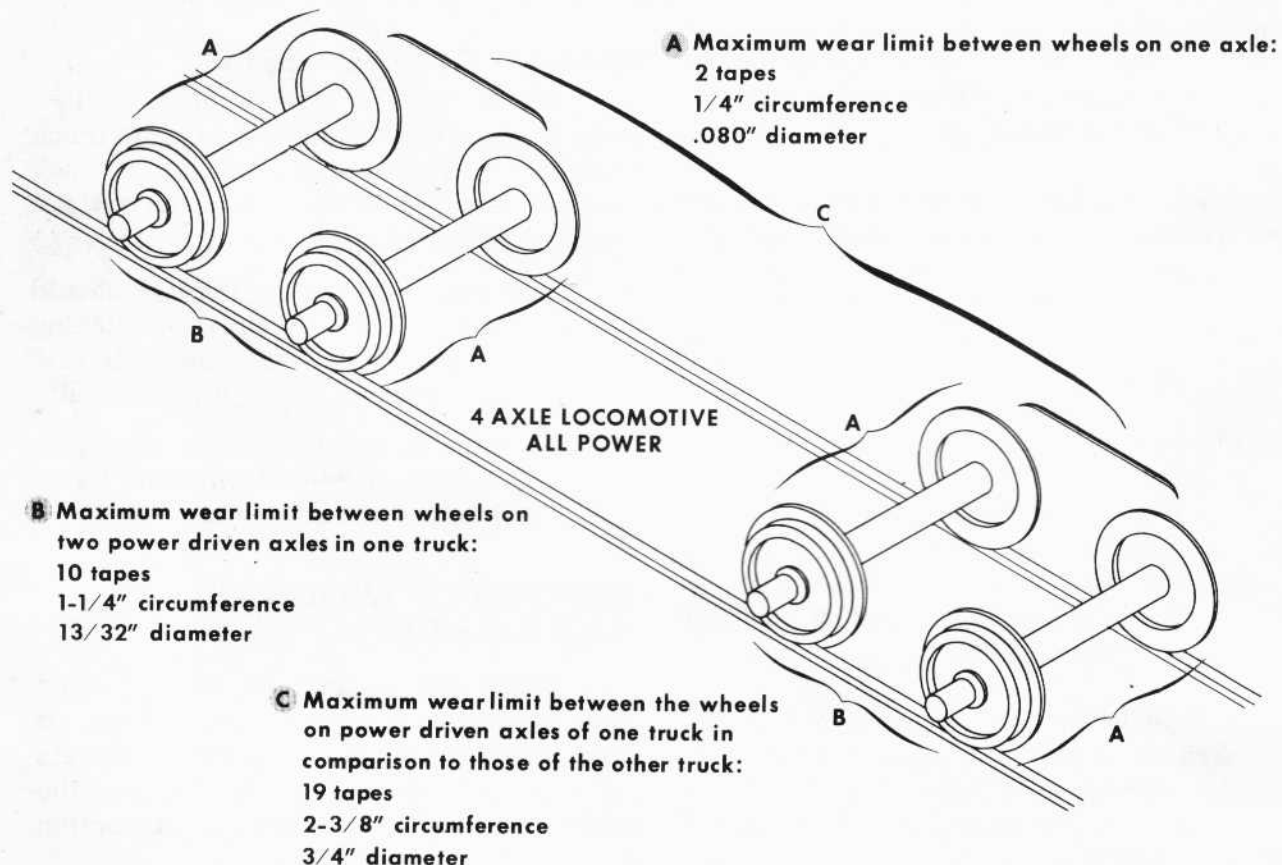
Wheel Wear Limits - 4 Axle Locomotives
